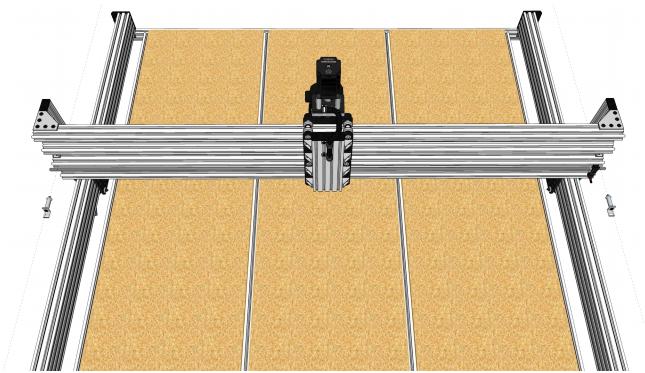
LEAD CNC Machine 1515 Disassembly: Remove Cable Chain Carrier
